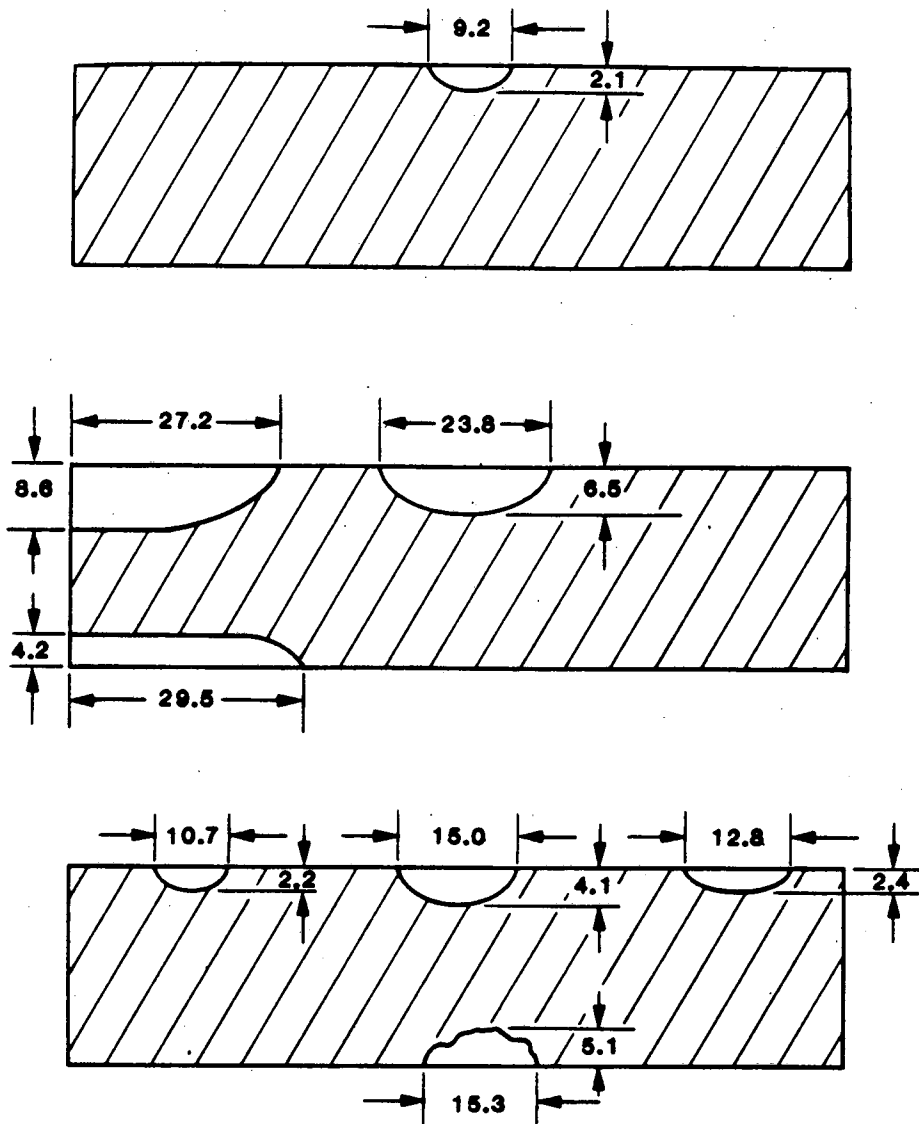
Actual Crack Sizes for Specimen 16 (mm) Shown Full Size
